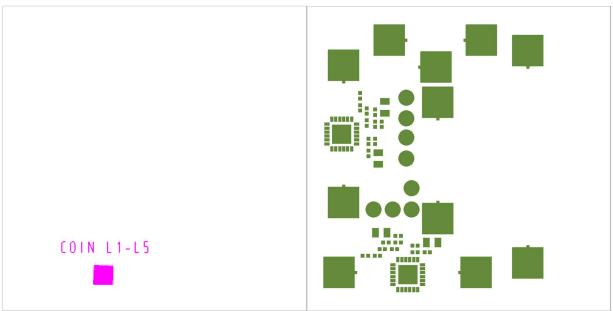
LH Coin layout board 1; RH Top solder mask board 1
